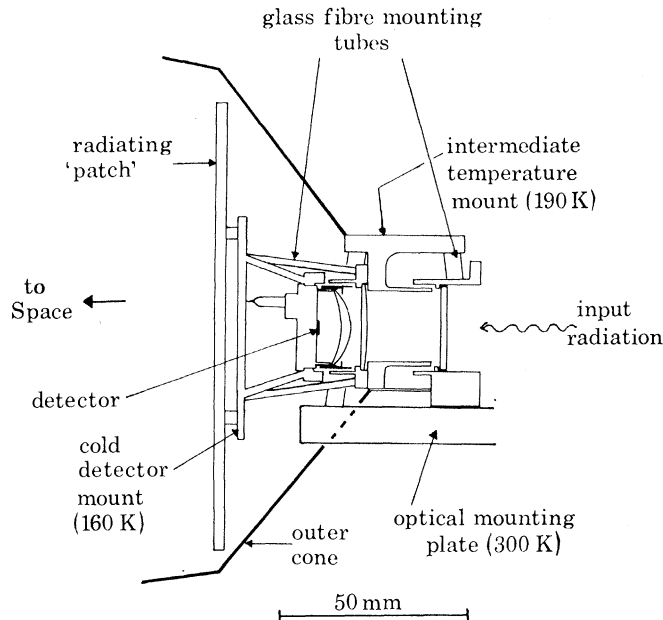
The s.a.m.s. cold detector assembly (InSb). The mount is in three parts: the detector mount at 160 K, the intermediate lens mount at 190 K and the mechanical interface at 298 K. The parts are interconnected by 8 glass fibre tubes, some of which may be seen in the diagram. The relative sizes of the 'radiating patch', which is black-painted, and the outer cone, which is coated with vapour deposited aluminium, can be seen in figure 8.
